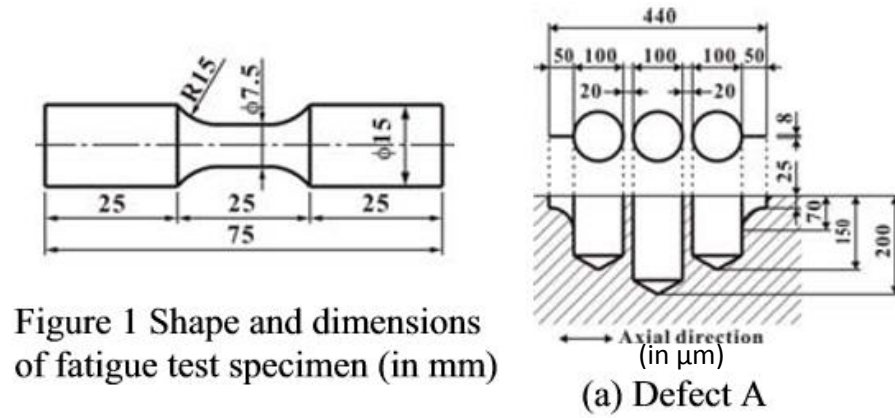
Shape and dimensions of test specimen and initial defect [8]
